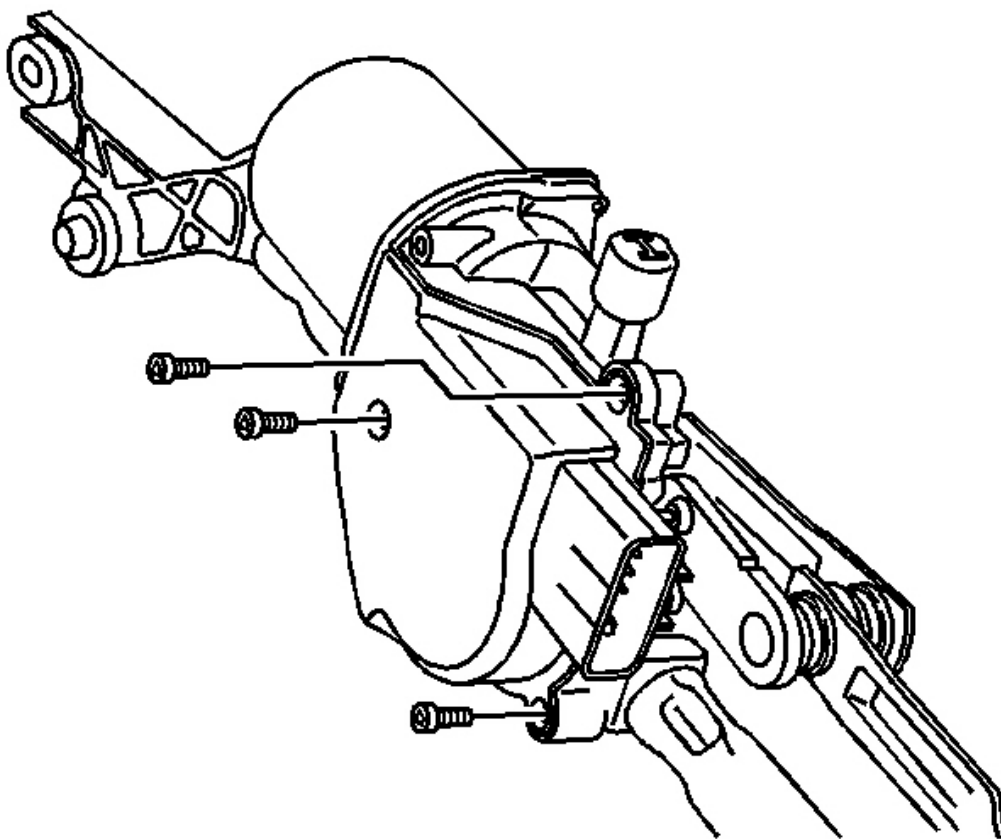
View Of Wiper Motor Cover Retaining Screws
